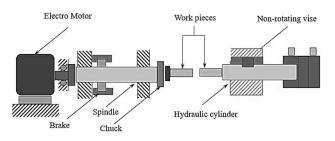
Rotational friction welding machine overview [1]. شكل 1 شماى كلى دستگاه جوش كارى اصطكاكى دورانى [1]
